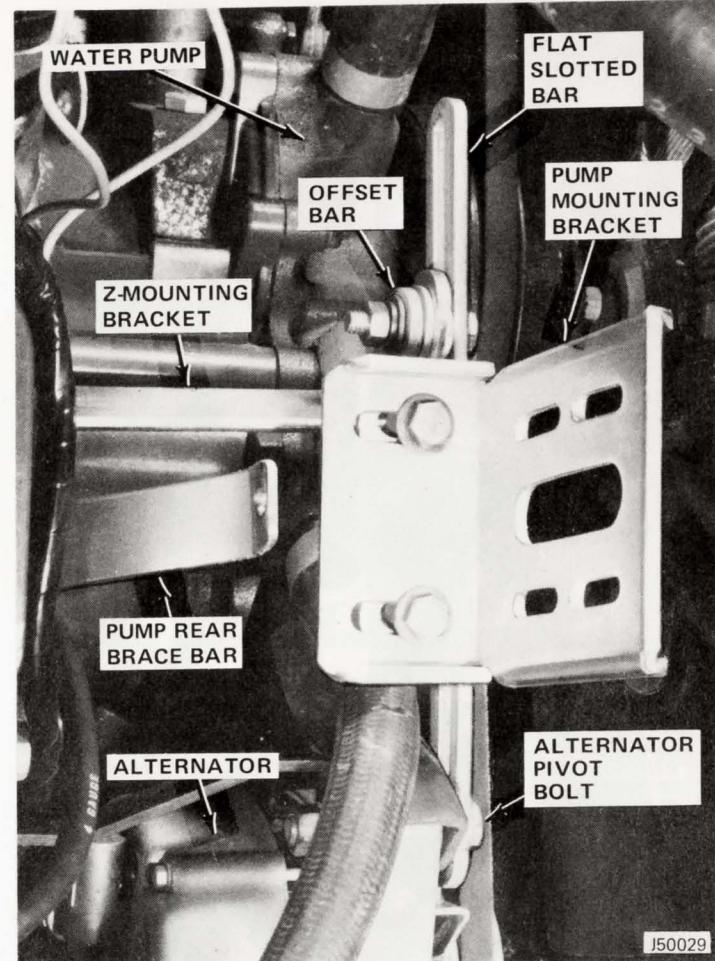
Pump Bracket Installation—Eight-Cylinder
